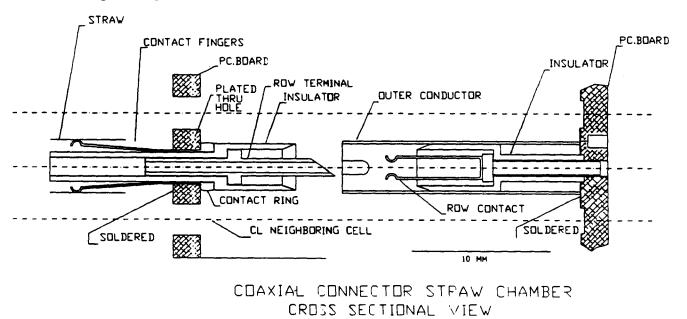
A scheme for anode wire and cathode tube electrical connection to the readout board. The sliding spring contacts permit ready attachment and removal of the board.
